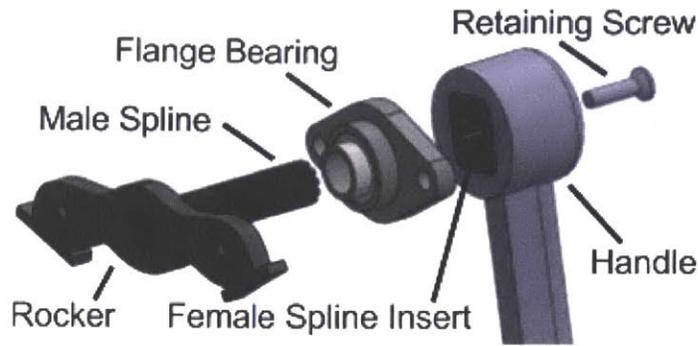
Exploded view of the handle attachment within the current system, lower enclosure omitted.
